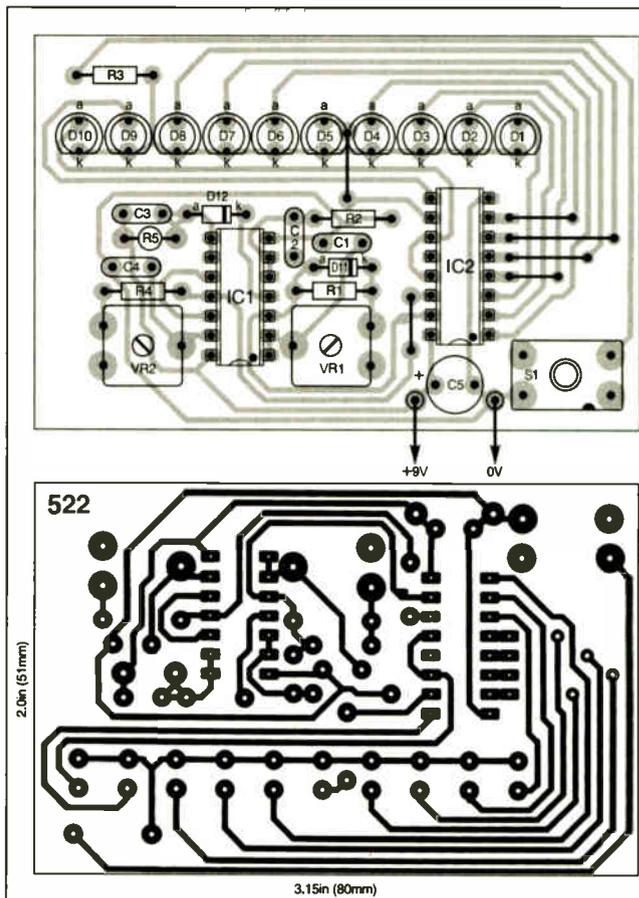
Printed circuit board component layout and full-size underside copper foil master pattern for the Room Thermometer.
